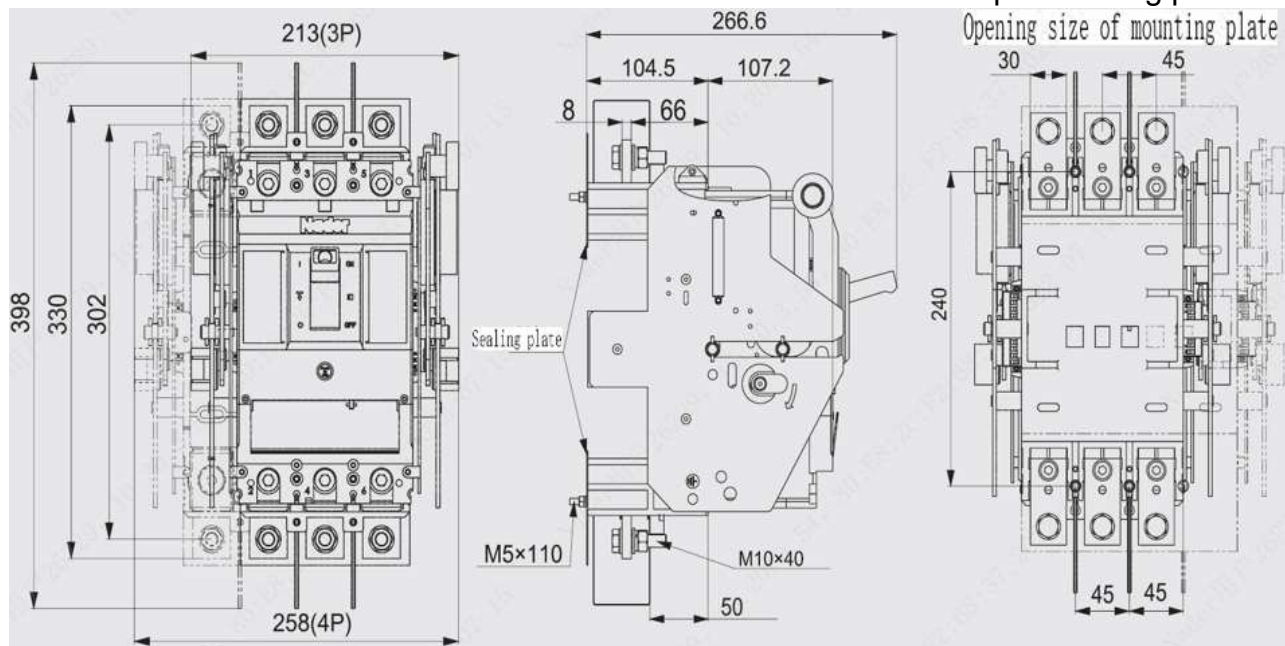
3P、4P outline dimensions of withdrawable front panel wiring products
